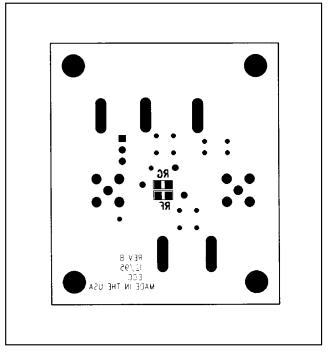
MAX4278 EV Kit Component Placement Guide—Solder Side
